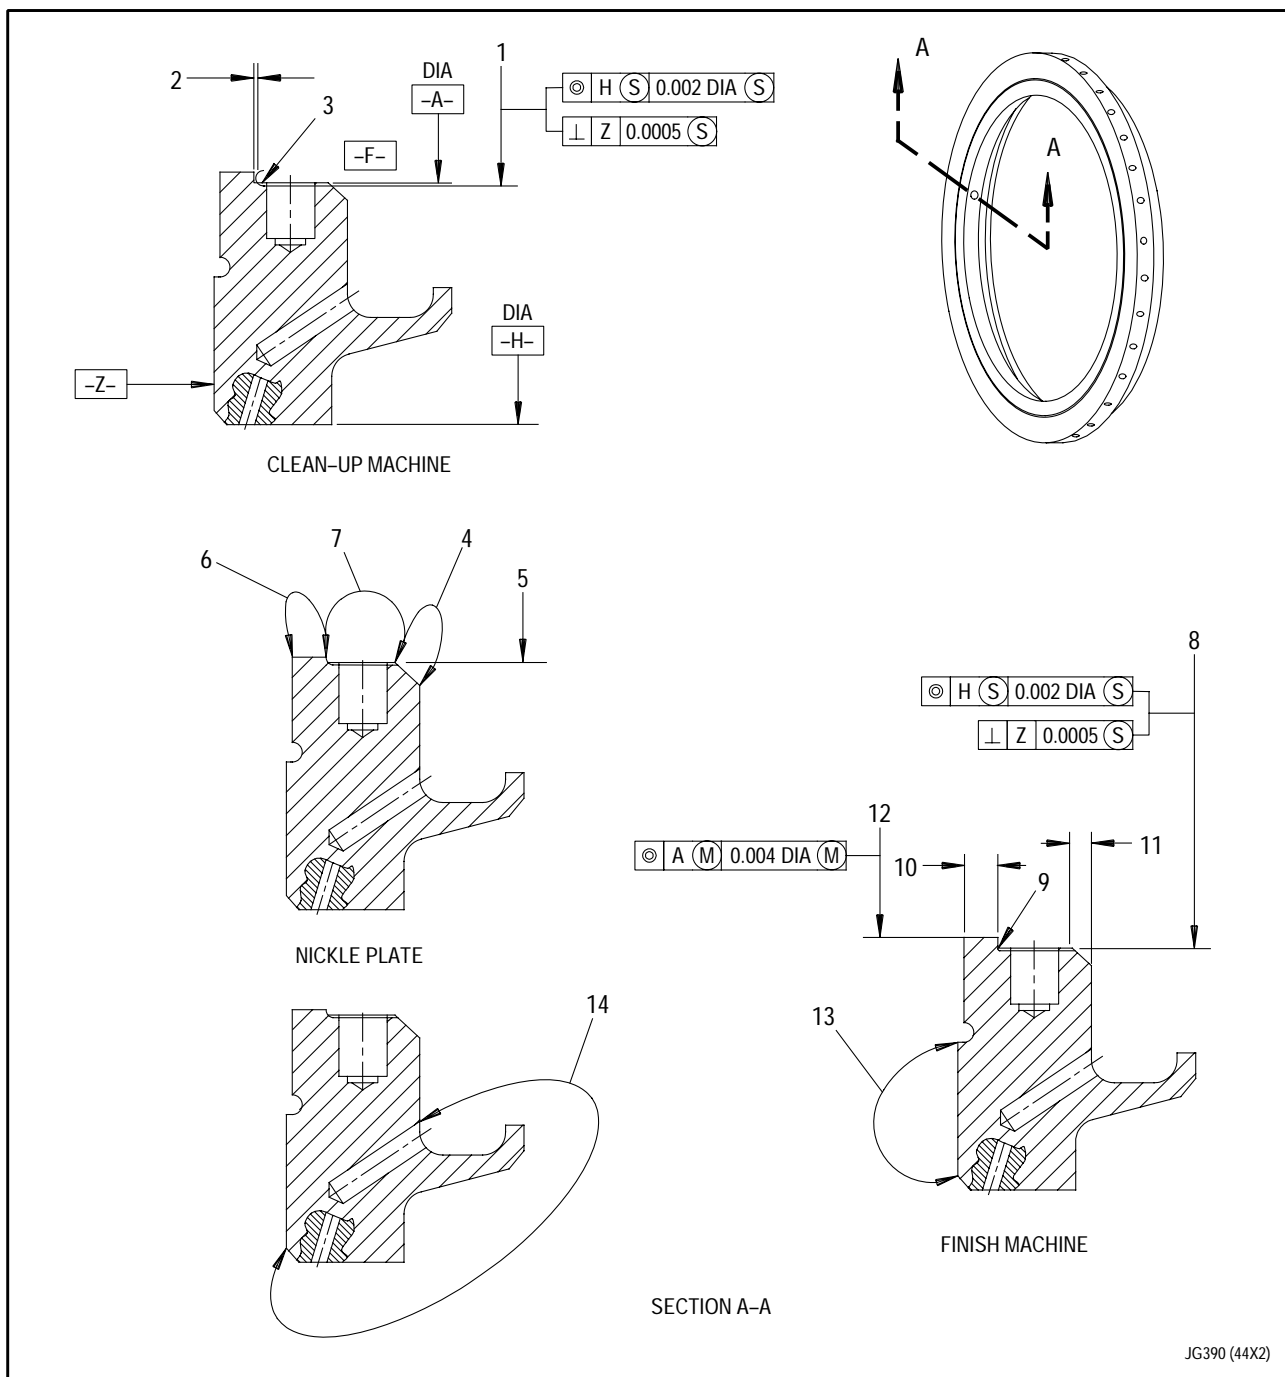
No. 3 Bearing Front Seal Seat Assembly - Nickel Plate Inside Diameter Repair
